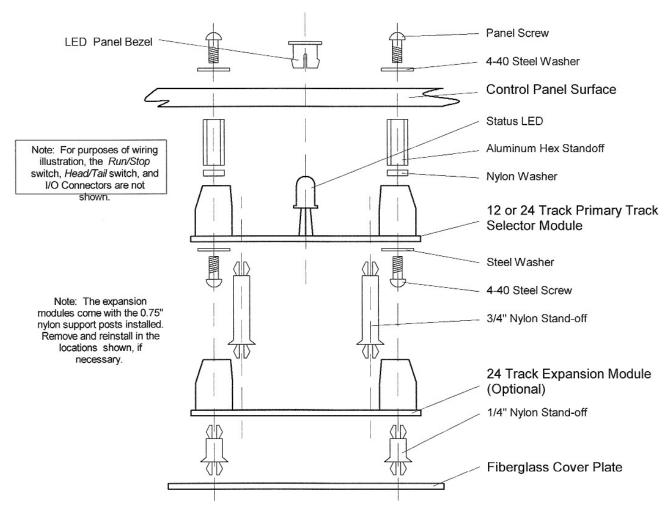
Track Selector Mounting Assembly with Stacked Expansion Module, Exploded View (End View, Scale = 1:1)
